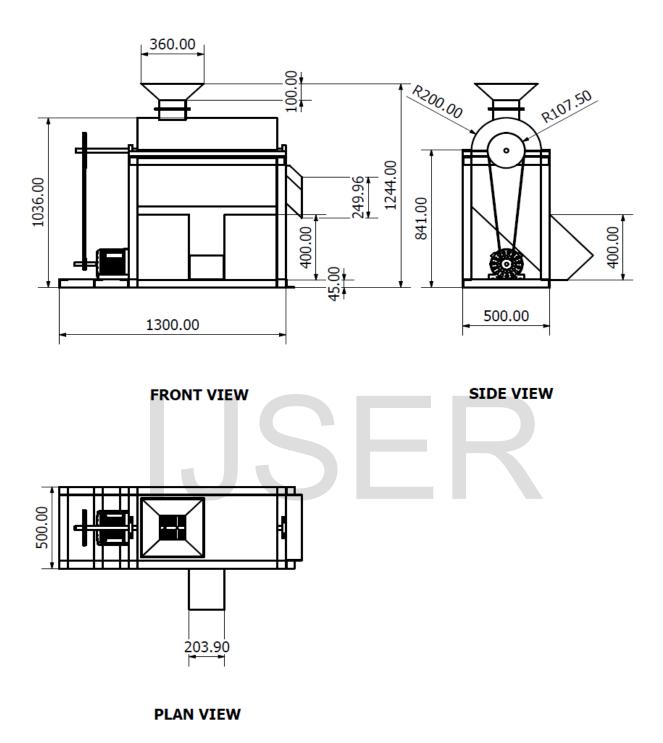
Orthographic view of the gari sifting machine (dimensions in mm)
